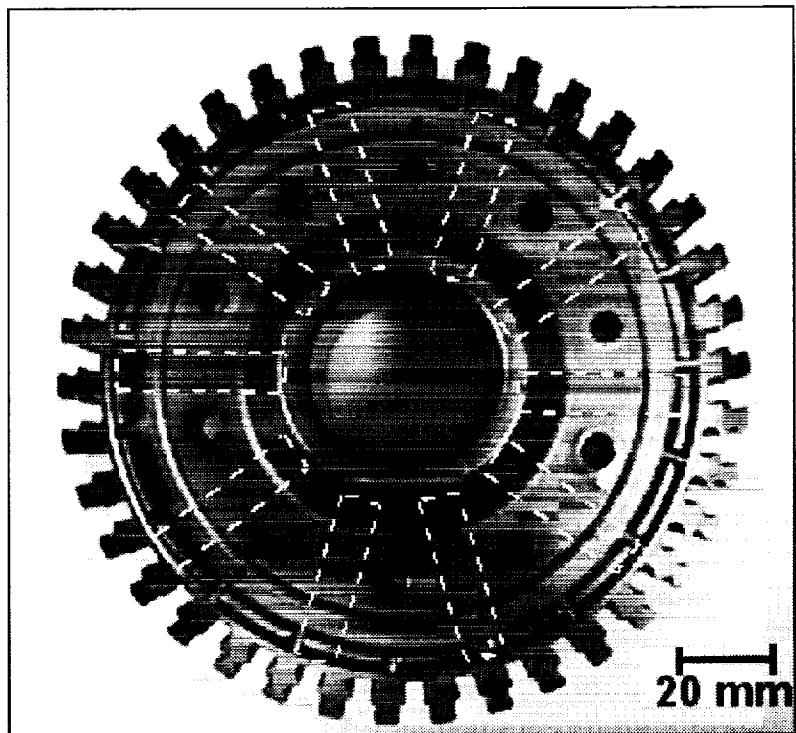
Fatigue crack growth specimen blank locations; T700 Stage 2 gas generator turbine disk.
